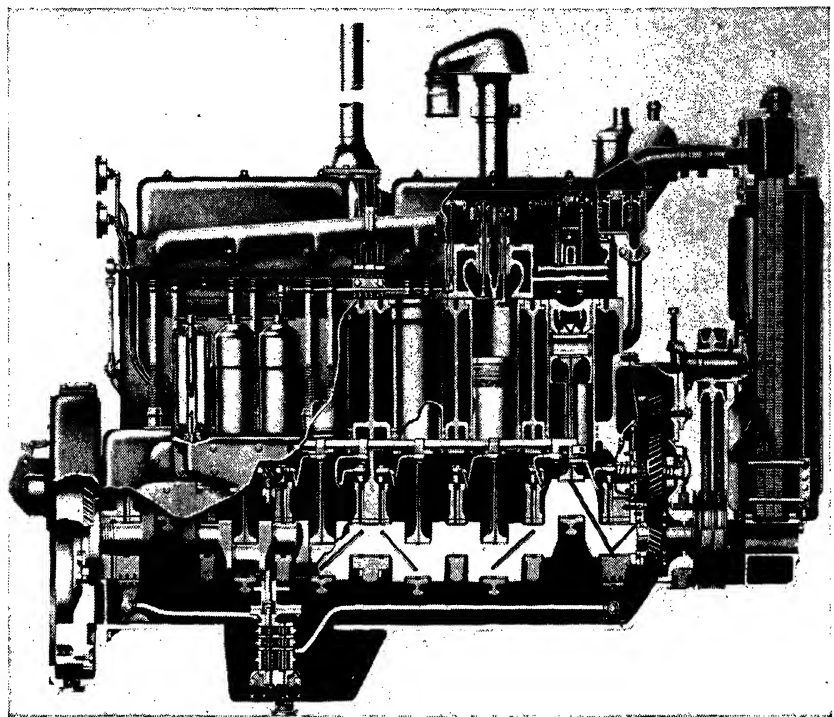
Heavy duty mobile type unit (Courtesy Caterpillar Tractor Co.)
